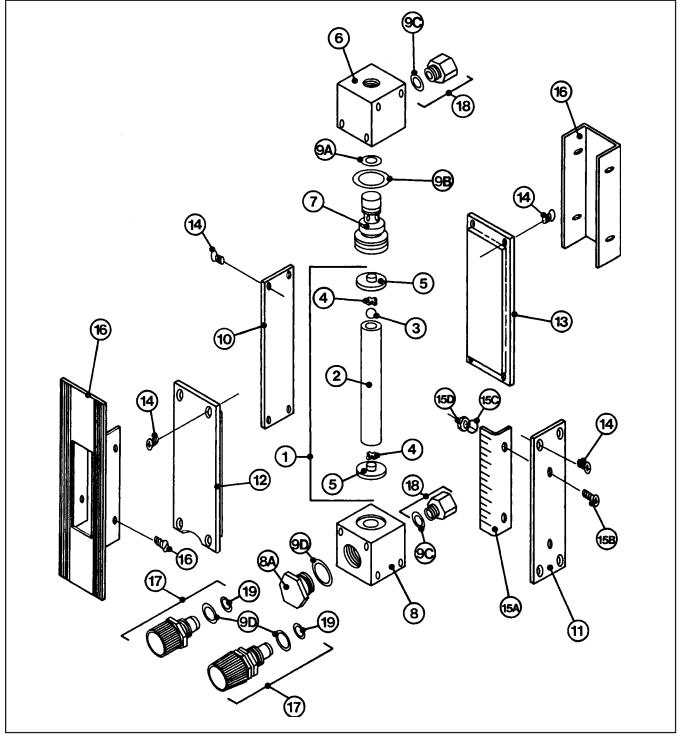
Parts Drawing Sho-Rate Models 1350E and 1355E
